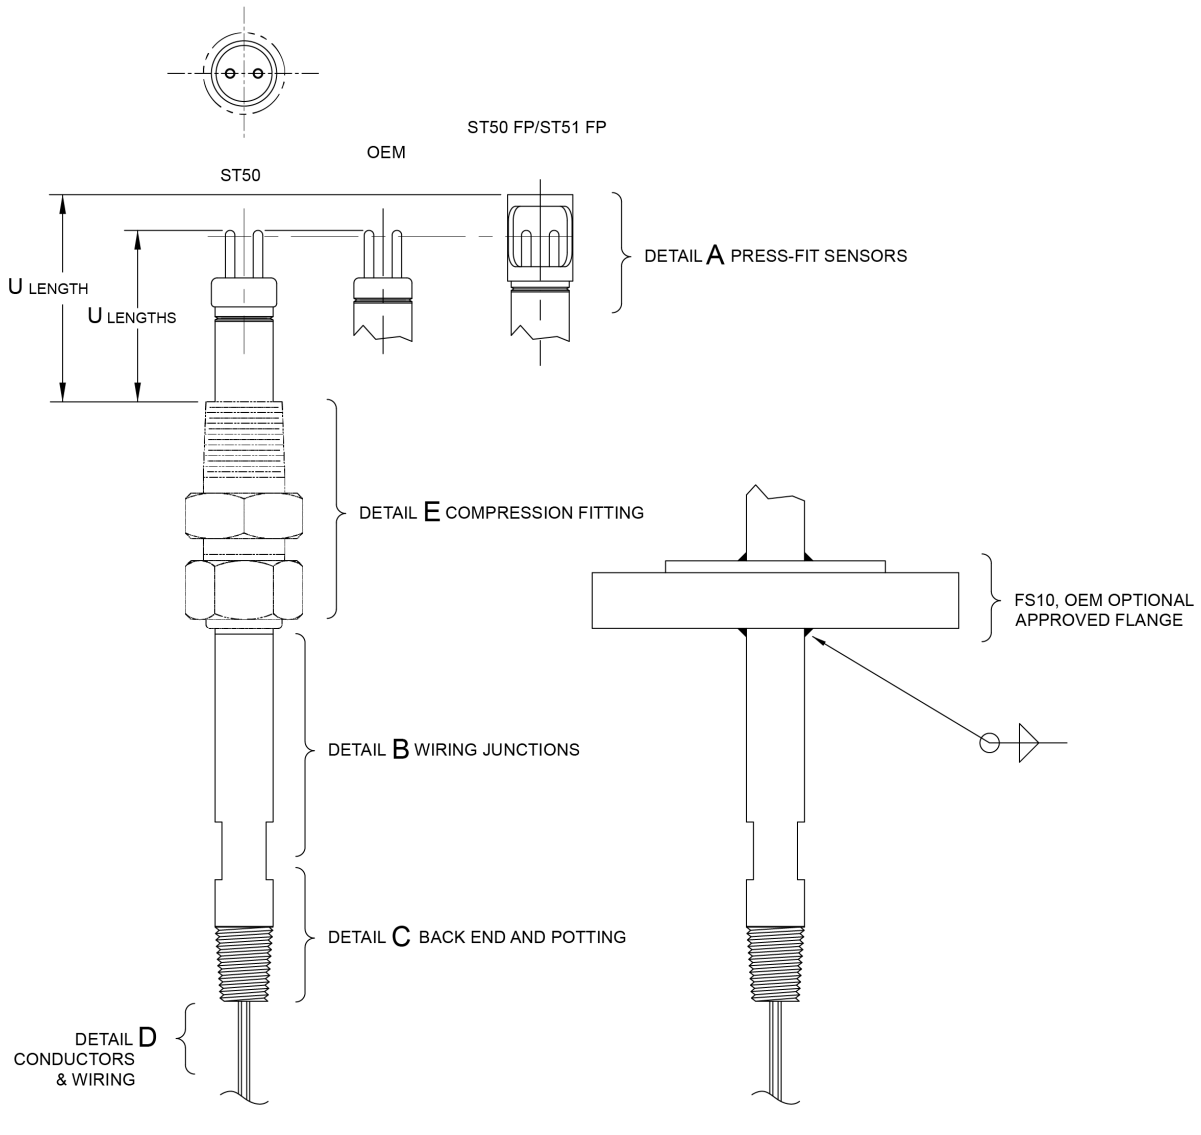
Typical Inline Installation ST75, FS10, OEM, Fixed U-Length Probe
